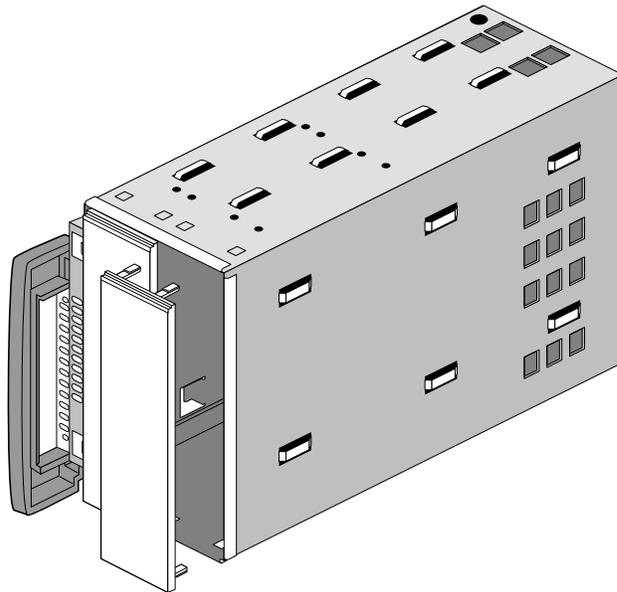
Removing a Peripheral Carrier Blanking Plate
